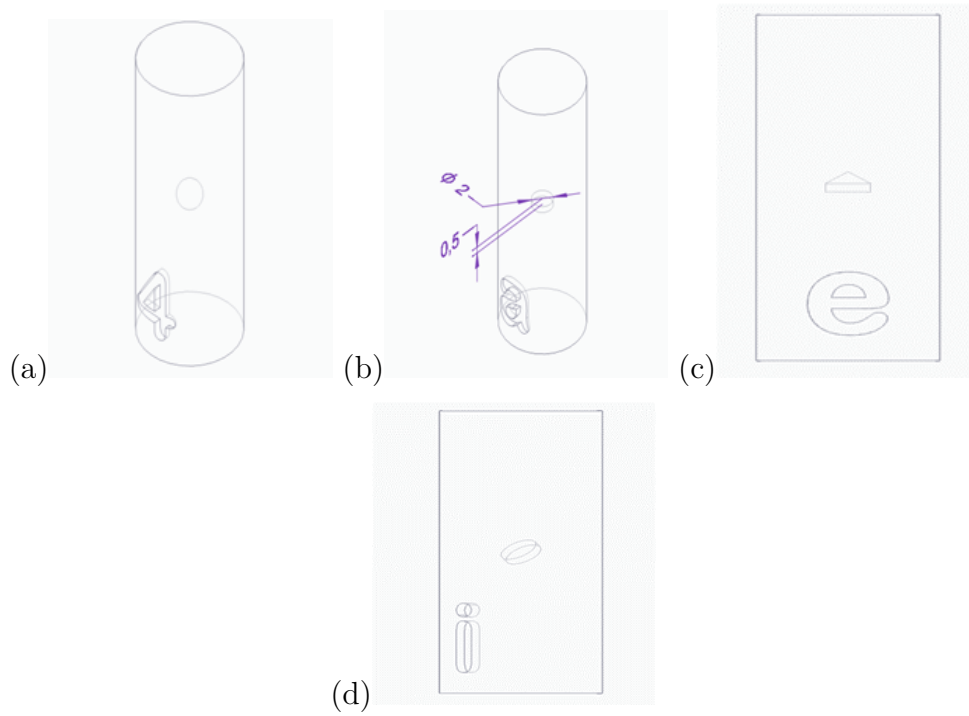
CAD design for IN939 cylindrical sample with (a) Internal sphere of defect size of 2 mm, (b) Penny defects with 0° tilt angle with defect size of 2 mm, (c) Penny defects with 0° tilt angle and 35° roof angle with defect size of 2 mm, (d) Penny defects with 45° tilt angle with defect size of 2 mm.
